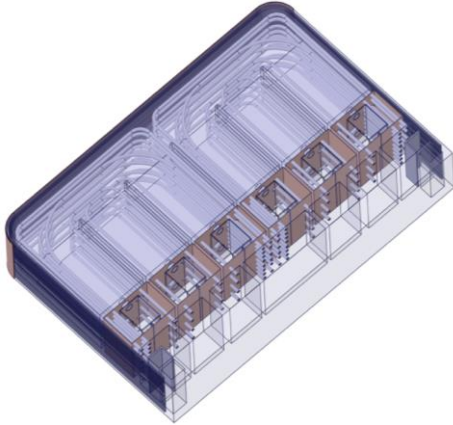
WCLL BU: perspective view of the outboard breeding unit, showing the inner cooling pipes layout.
